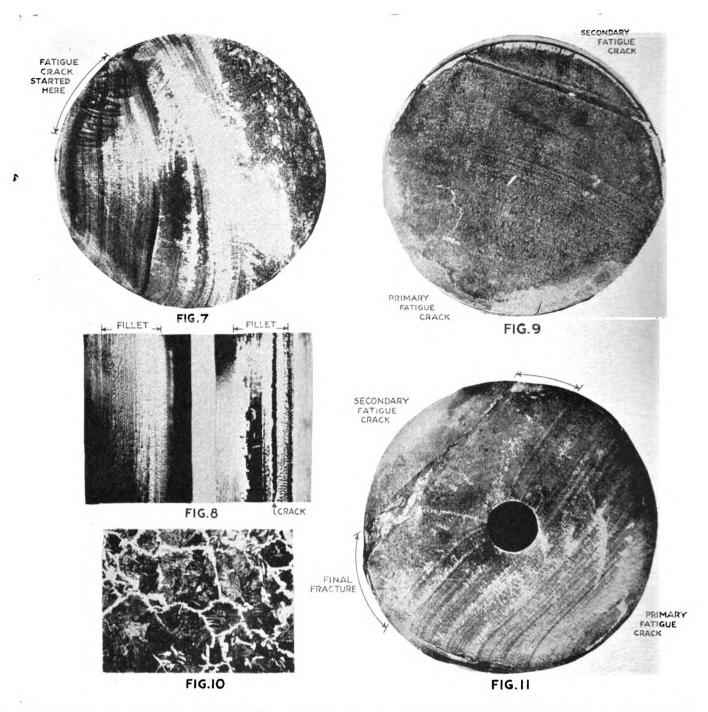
Broken surface of a solid crank pin. The material was apparently somewhat inferior, but poor machine finish, as shown in Fig. 8, was probably the primary cause of failure. Fig. 8—Micro-photograph showing crack and rough machining in the fillet of the crank pin, the broken surface of which is shown in Fig. 7. Fig. 9—Surface of break in this crank pin indicates rapid progress of fatigue crack. Fig. 10—Microscopic view showing coarse structure of material in crank pin, the break in which was illustrated in Fig. 9. Fig. 11—Another crank pin which failed because of roughness in the fillet
